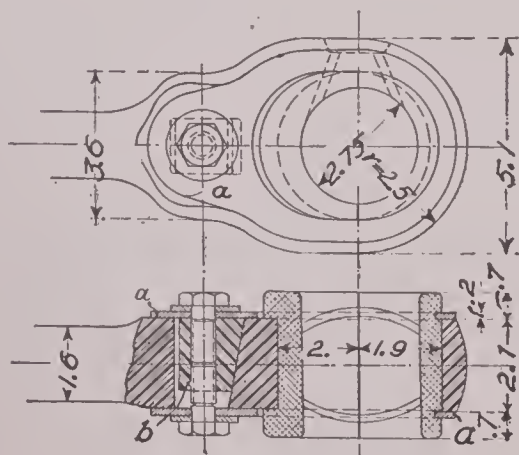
Connecting Rod for 100 H.P. Güldner Engine ($D=18.75''$, $S=27.5''$).
